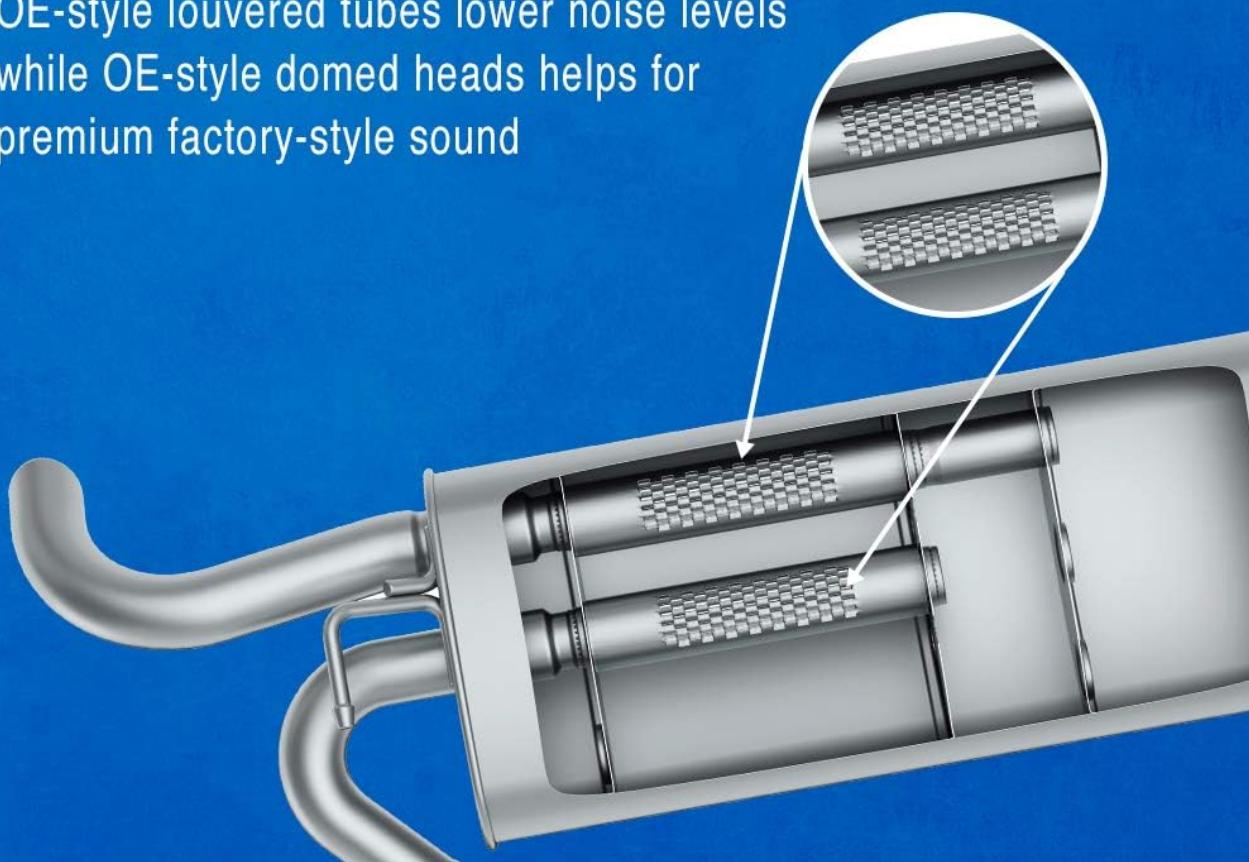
Cutaway view illustrating the louvered tube design for acoustic control.
